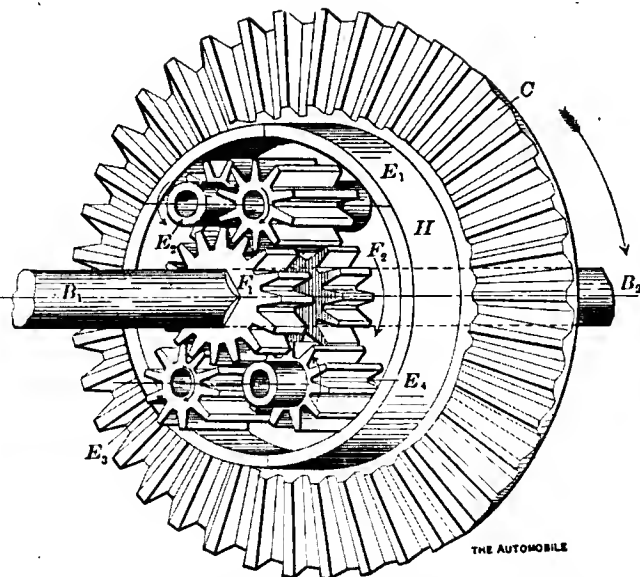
PERSPECTIVE VIEW OF THE SAME GEAR WITH THE DIFFERENTIAL CASING PARTLY REMOVED.
